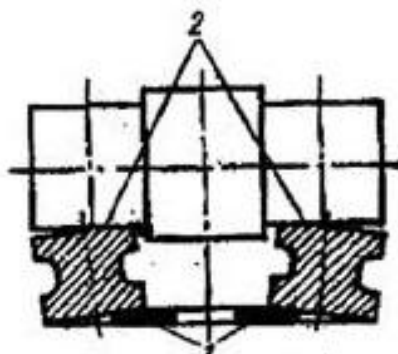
Fitting the head bearings of Burmeister & Wine engines
